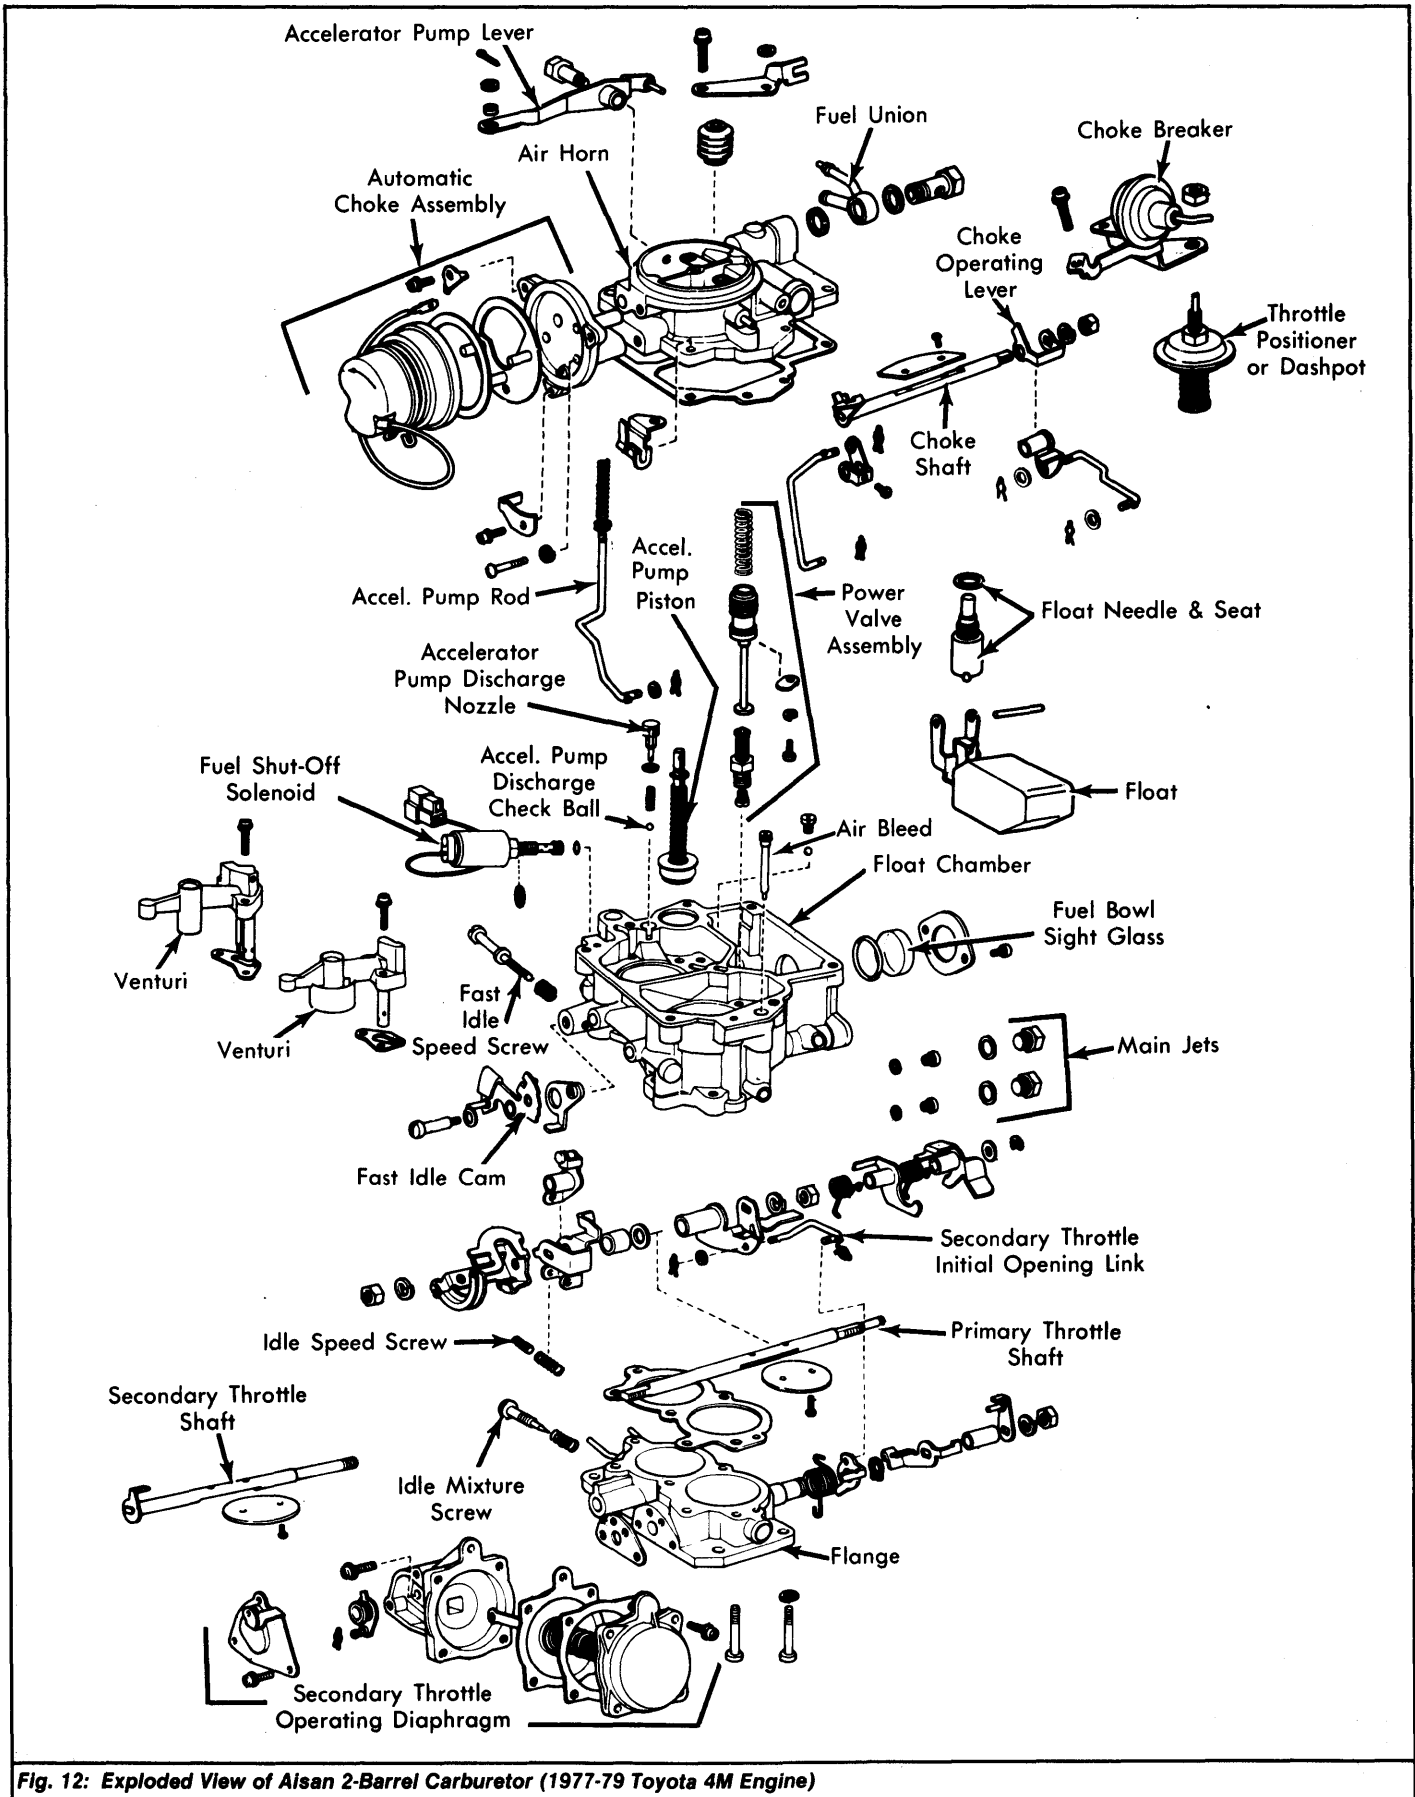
Exploded View of Aisan 2-Barrel Carburetor (1977-79 Toyota 4M Engine)
